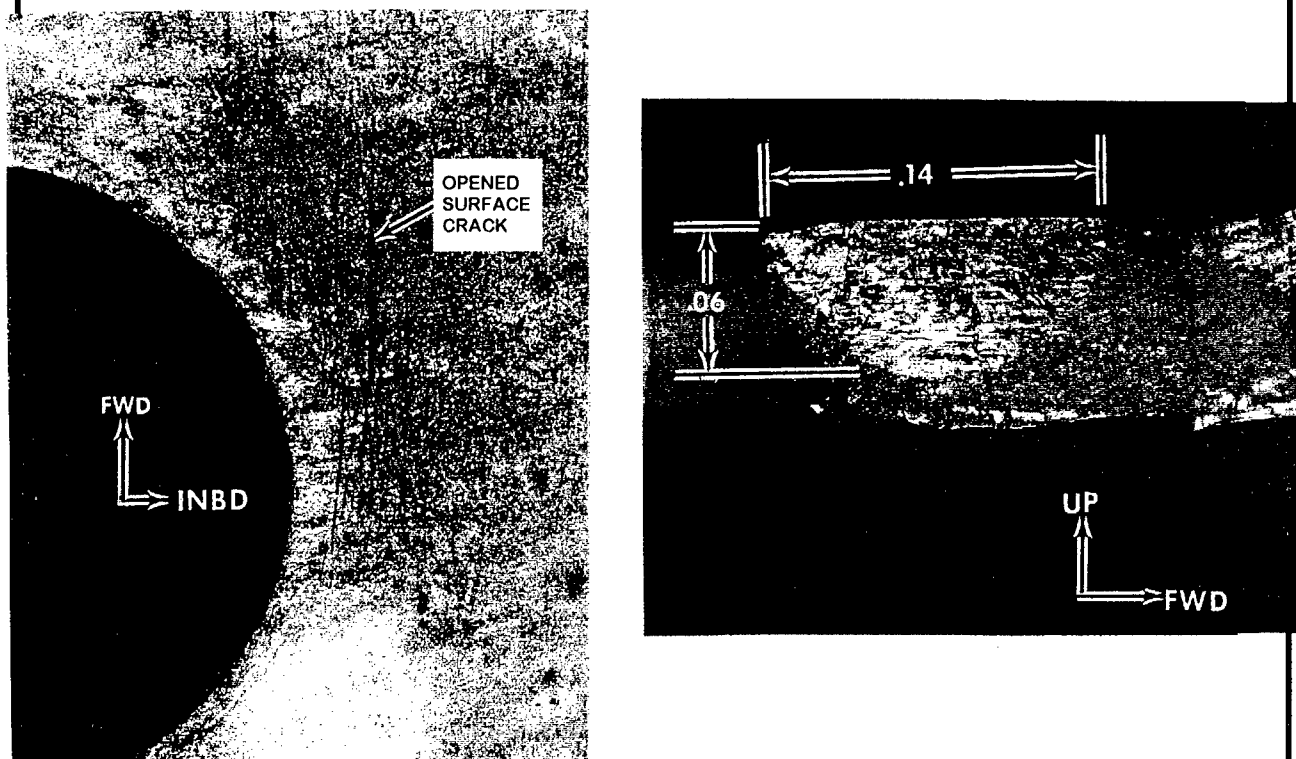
Typical Surface Crack Pattern and Extent after Opening
